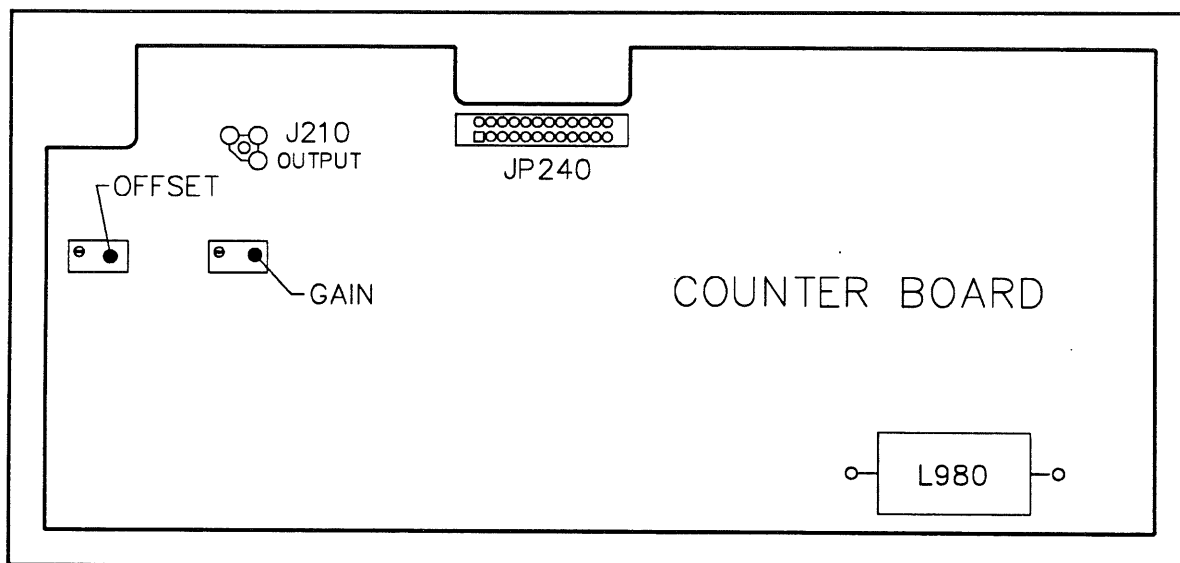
Patch Connector Locations on Counter Circuit Board.
